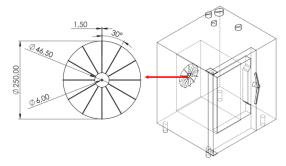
Geometry of the Convective Fan within the Furnace Chamber
